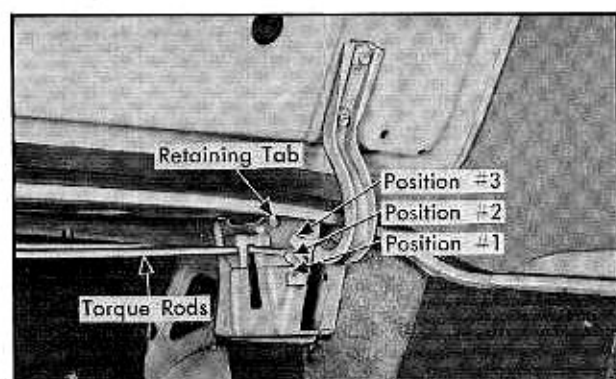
Deck Lid Torsion Rod Adjustment
